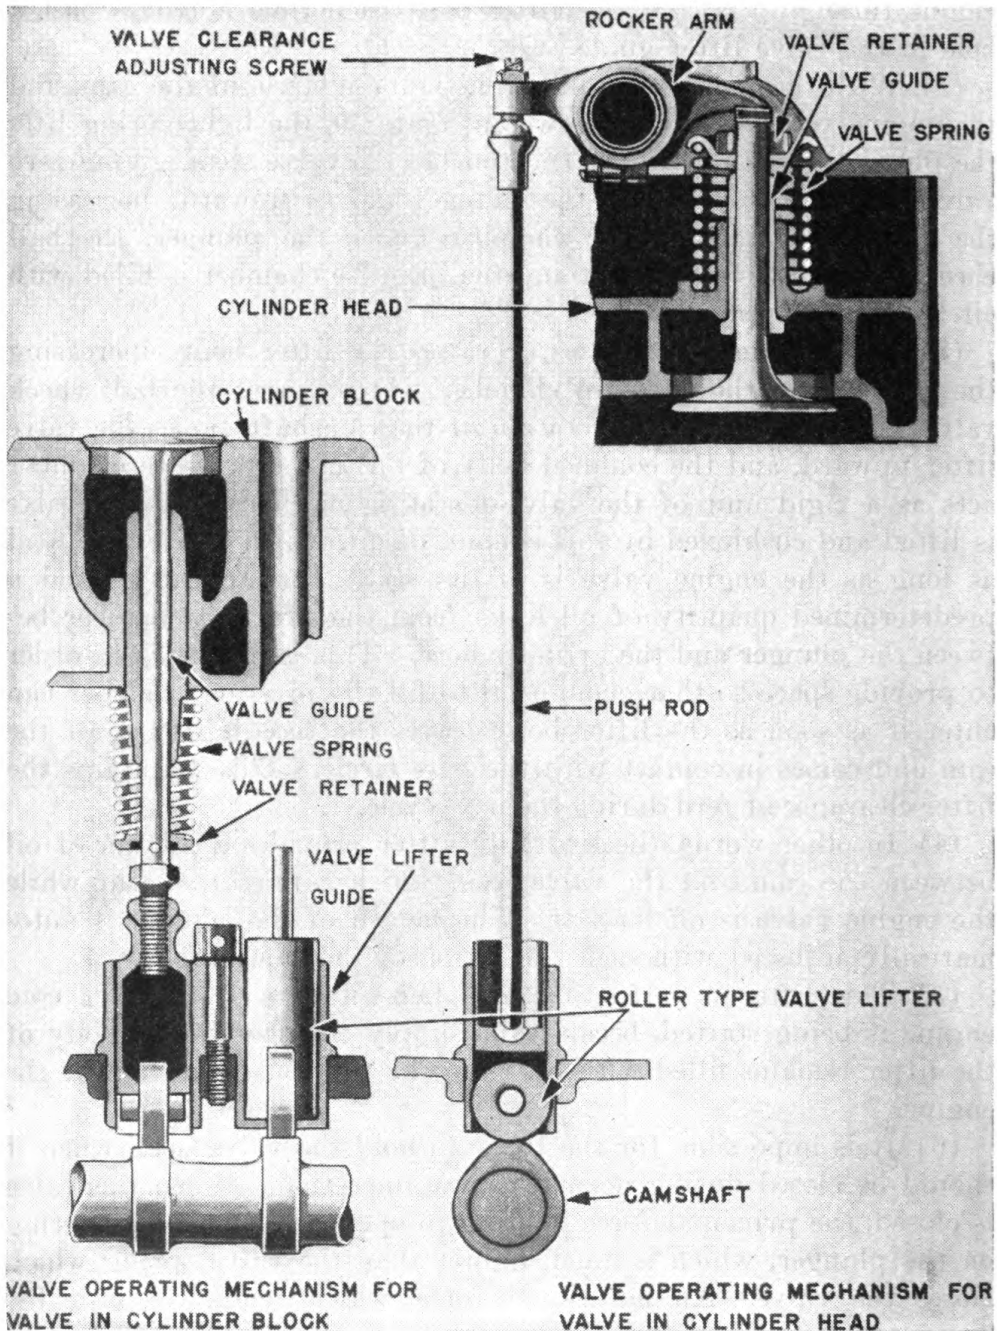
Valve-operating mechanisms used in L-head, I-head, and F-head engines.
